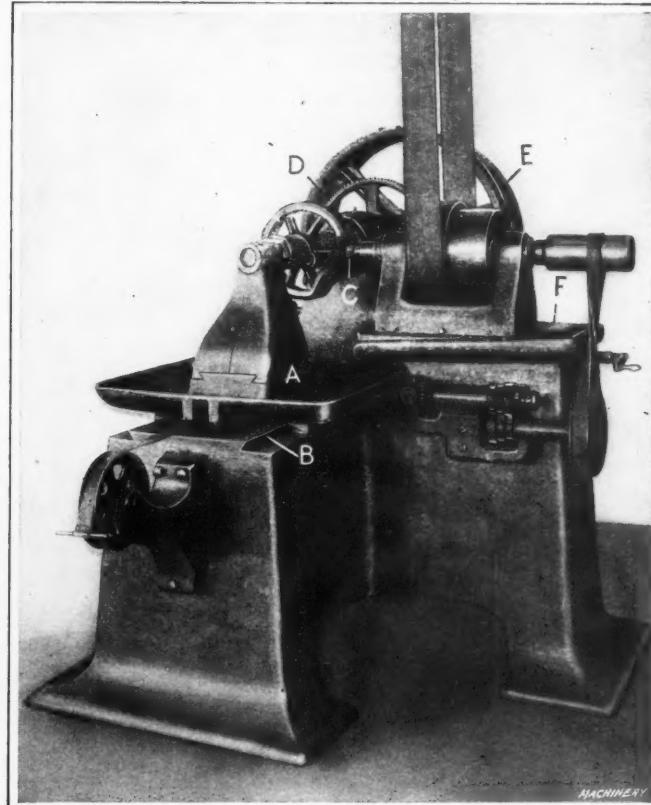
Universal Cam Cutting Machine for making Cams used on "Radical" Automatics
